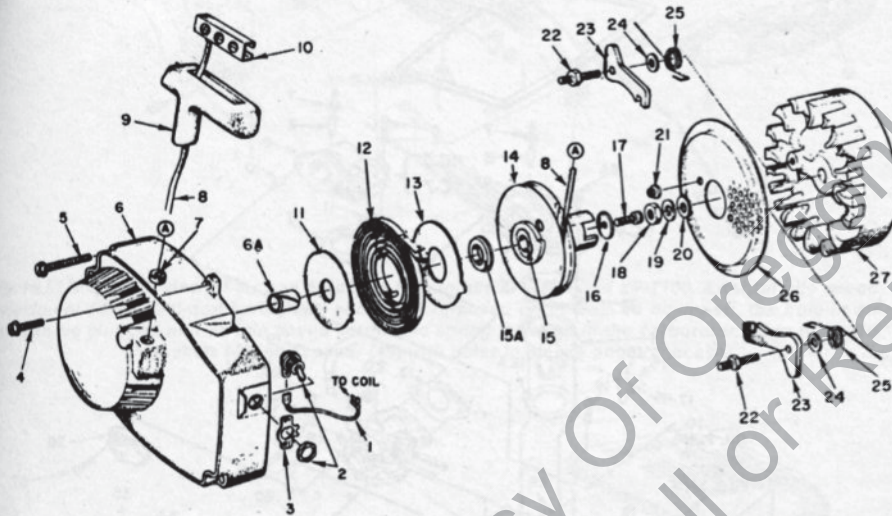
Exploded view of later production rewind starter except XL-400 Automatic.
